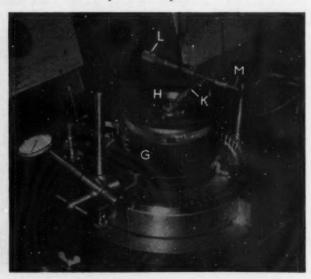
A small dividing head which has been designed and built by the A.I.D. for checking the angular errors of electrical synchros for aircraft and guided missiles
